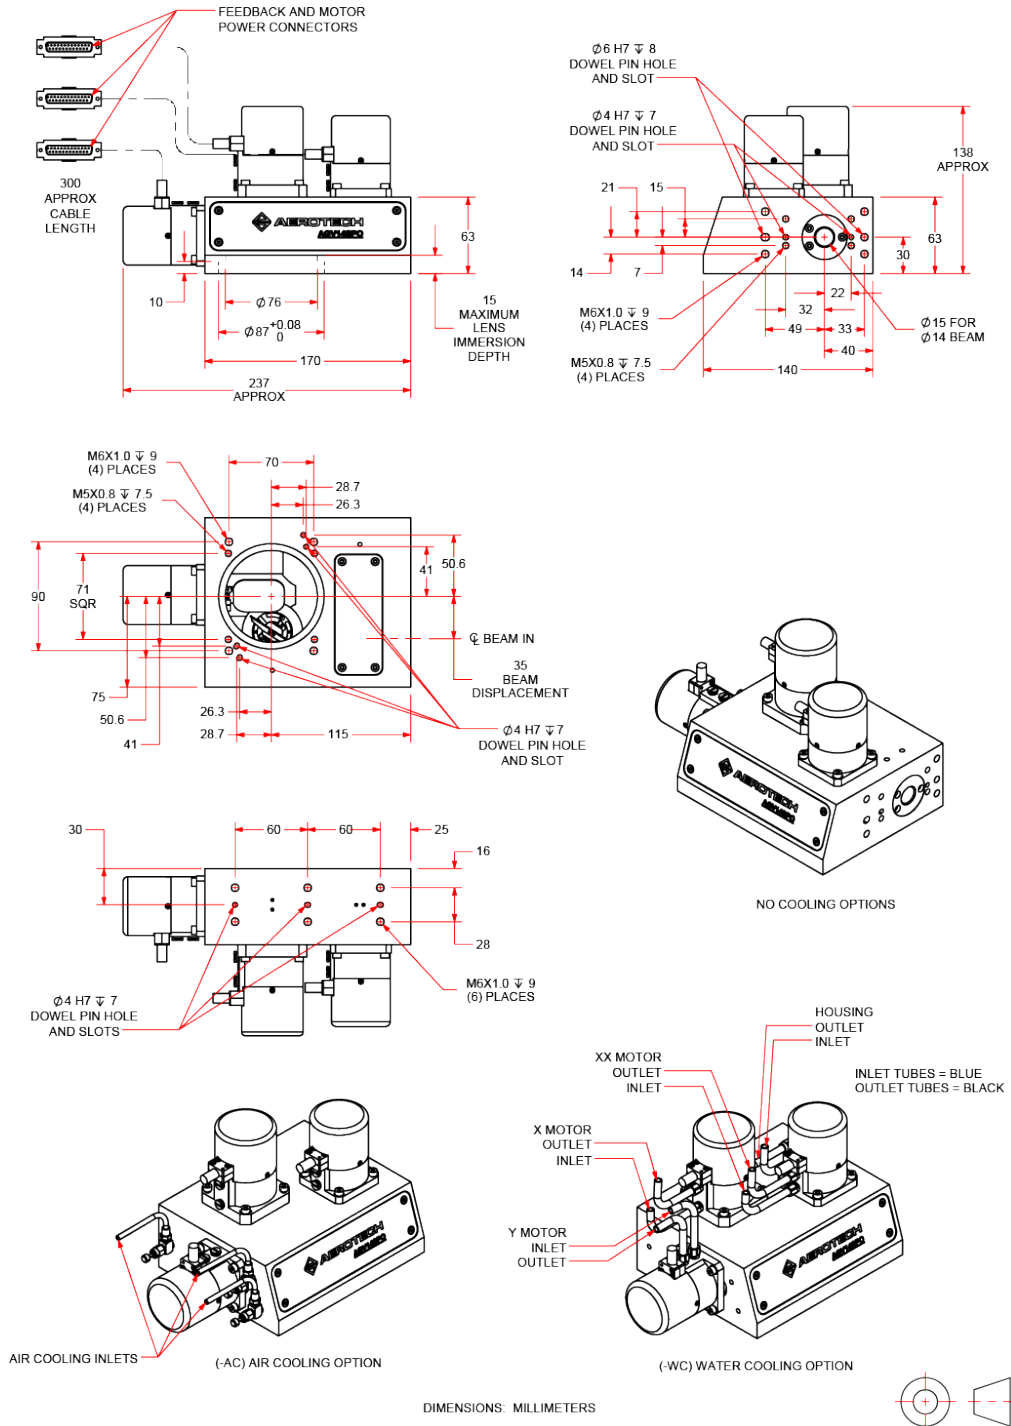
AGV14SPO Galvanometer Scanner Dimensions
